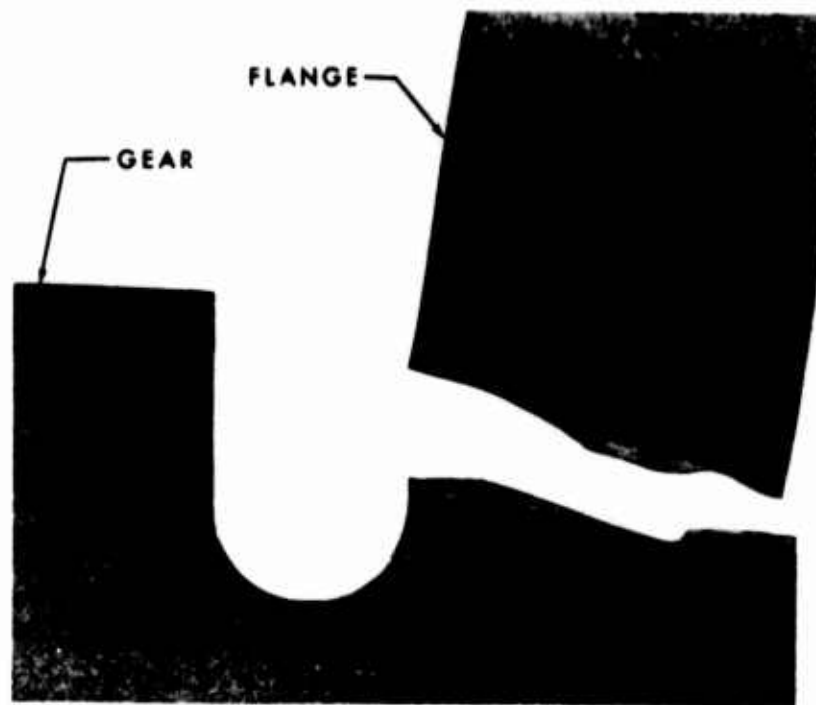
Gear/Flange Separation - Second-Row Pinion.
